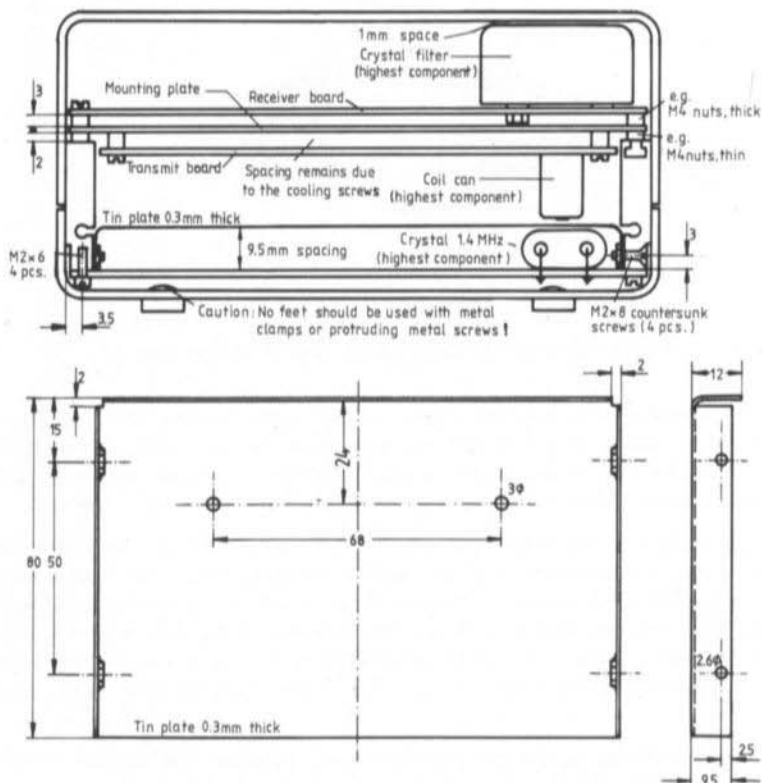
Screening panel and mounting in the ULM 70 transceiver
